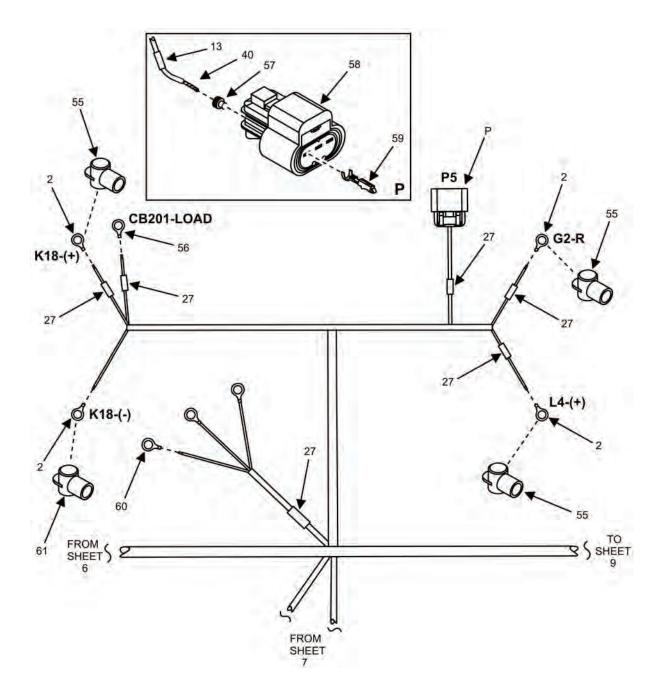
Engine Wiring Harness (Sheet 8 of 15).
